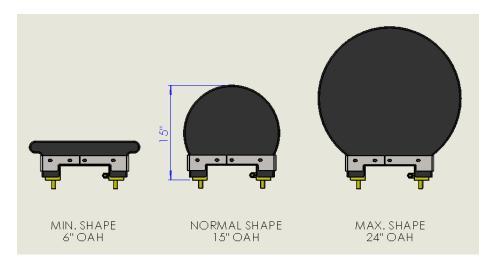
Primary Seal Bladder Segment - Expansion Shapes
